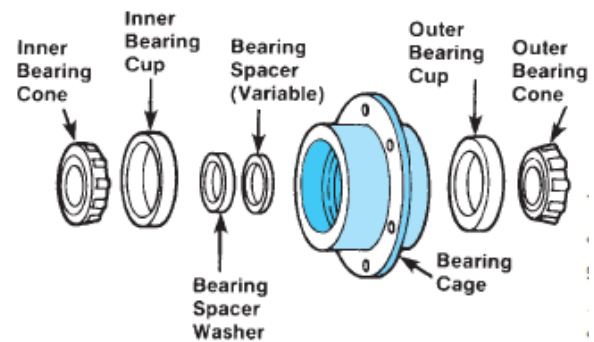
Correct orientation of parts in a pinion cage assembly before adjusting the preload
